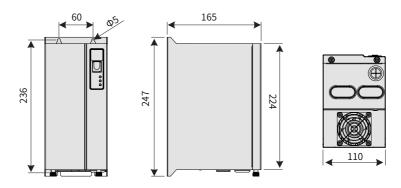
Overall dimensions of the MDBUN series braking unit (unit: mm)
